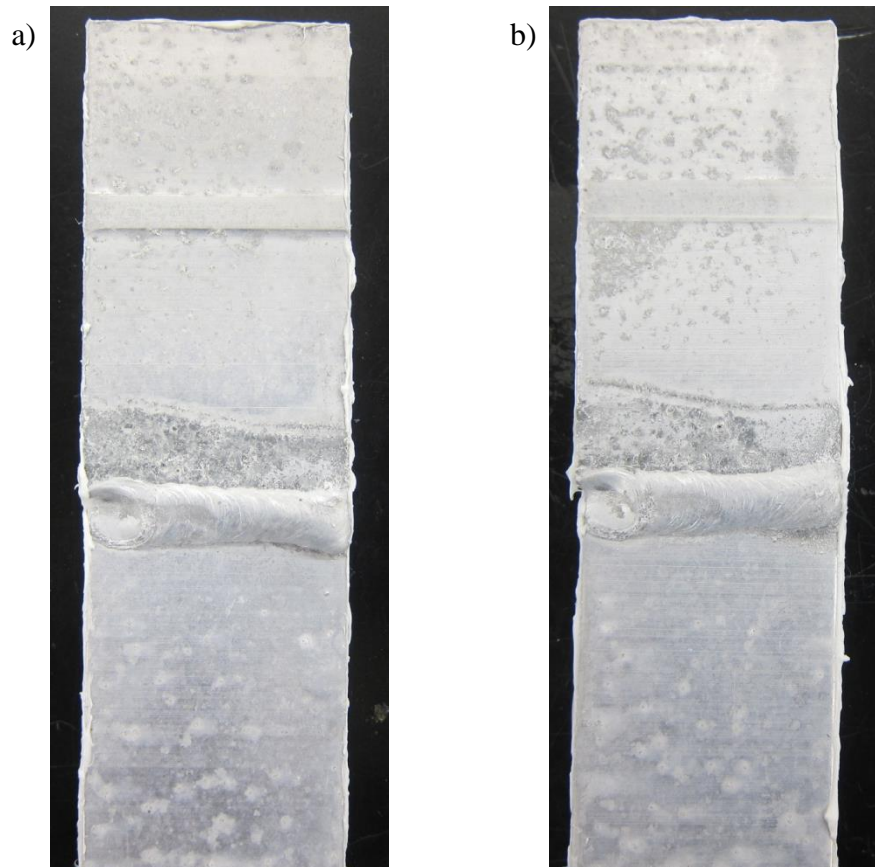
Duplicate samples of lap-joint welded configuration II (ER5356/AA7108/≡) in the as-welded T6 condition.
